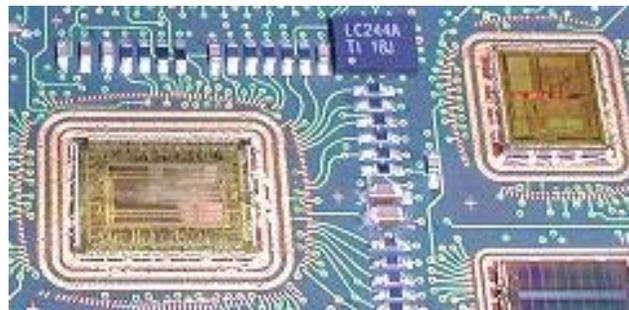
COB assembly (chips directly wire-bonded to the PCB)
